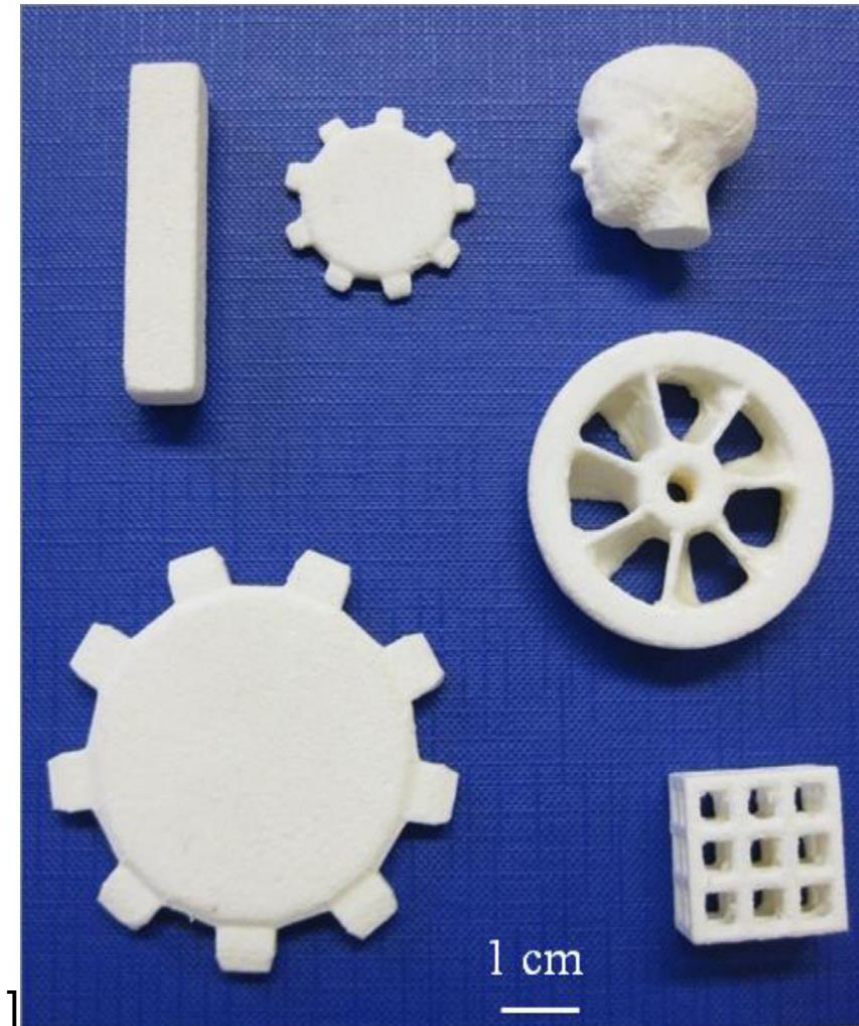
Complex parts produced by the SLS – pressure infiltration – debinding – sintering route. [1]
